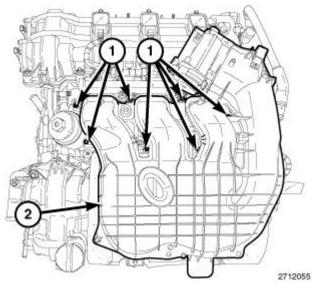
Upper Intake Manifold & Bolts Courtesy of CHRYSLER GROUP, LLC
